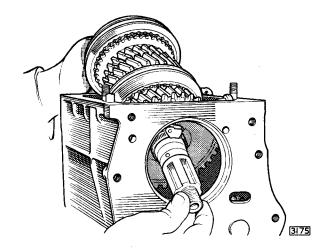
Removal of the mainshaft. Note the hose clamp fitted to rotain reverse gear
